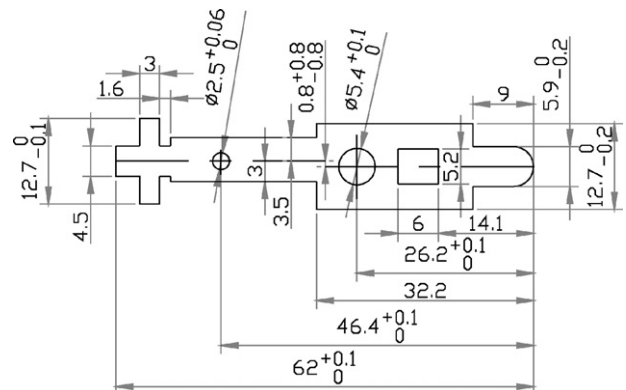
Example component (all dimensions in mm): Brass, sheet thickness = 0.6 mm.
